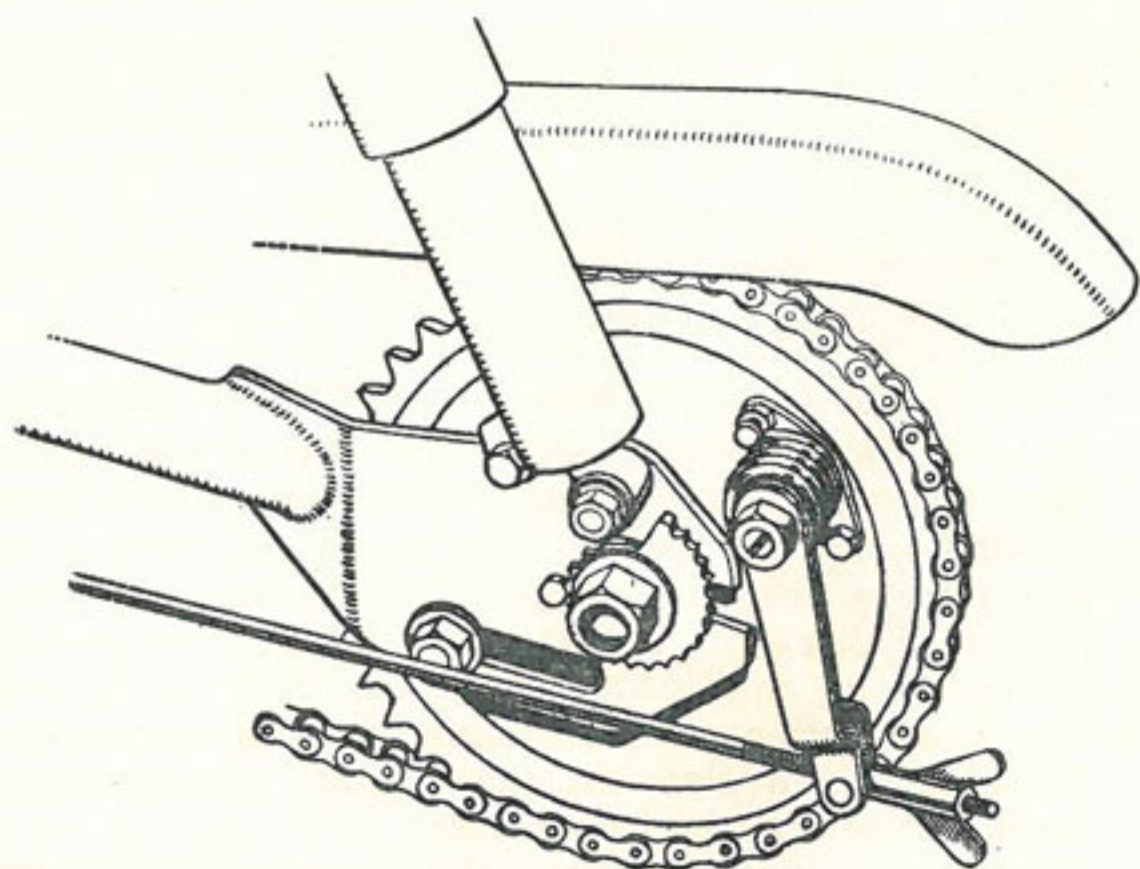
The rear chain is adjusted by slackening the wheel spindle nuts and turning the notched cam plates on either side of the wheel fork. A wing nut on the end of the brake rod adjusts the rear brake
